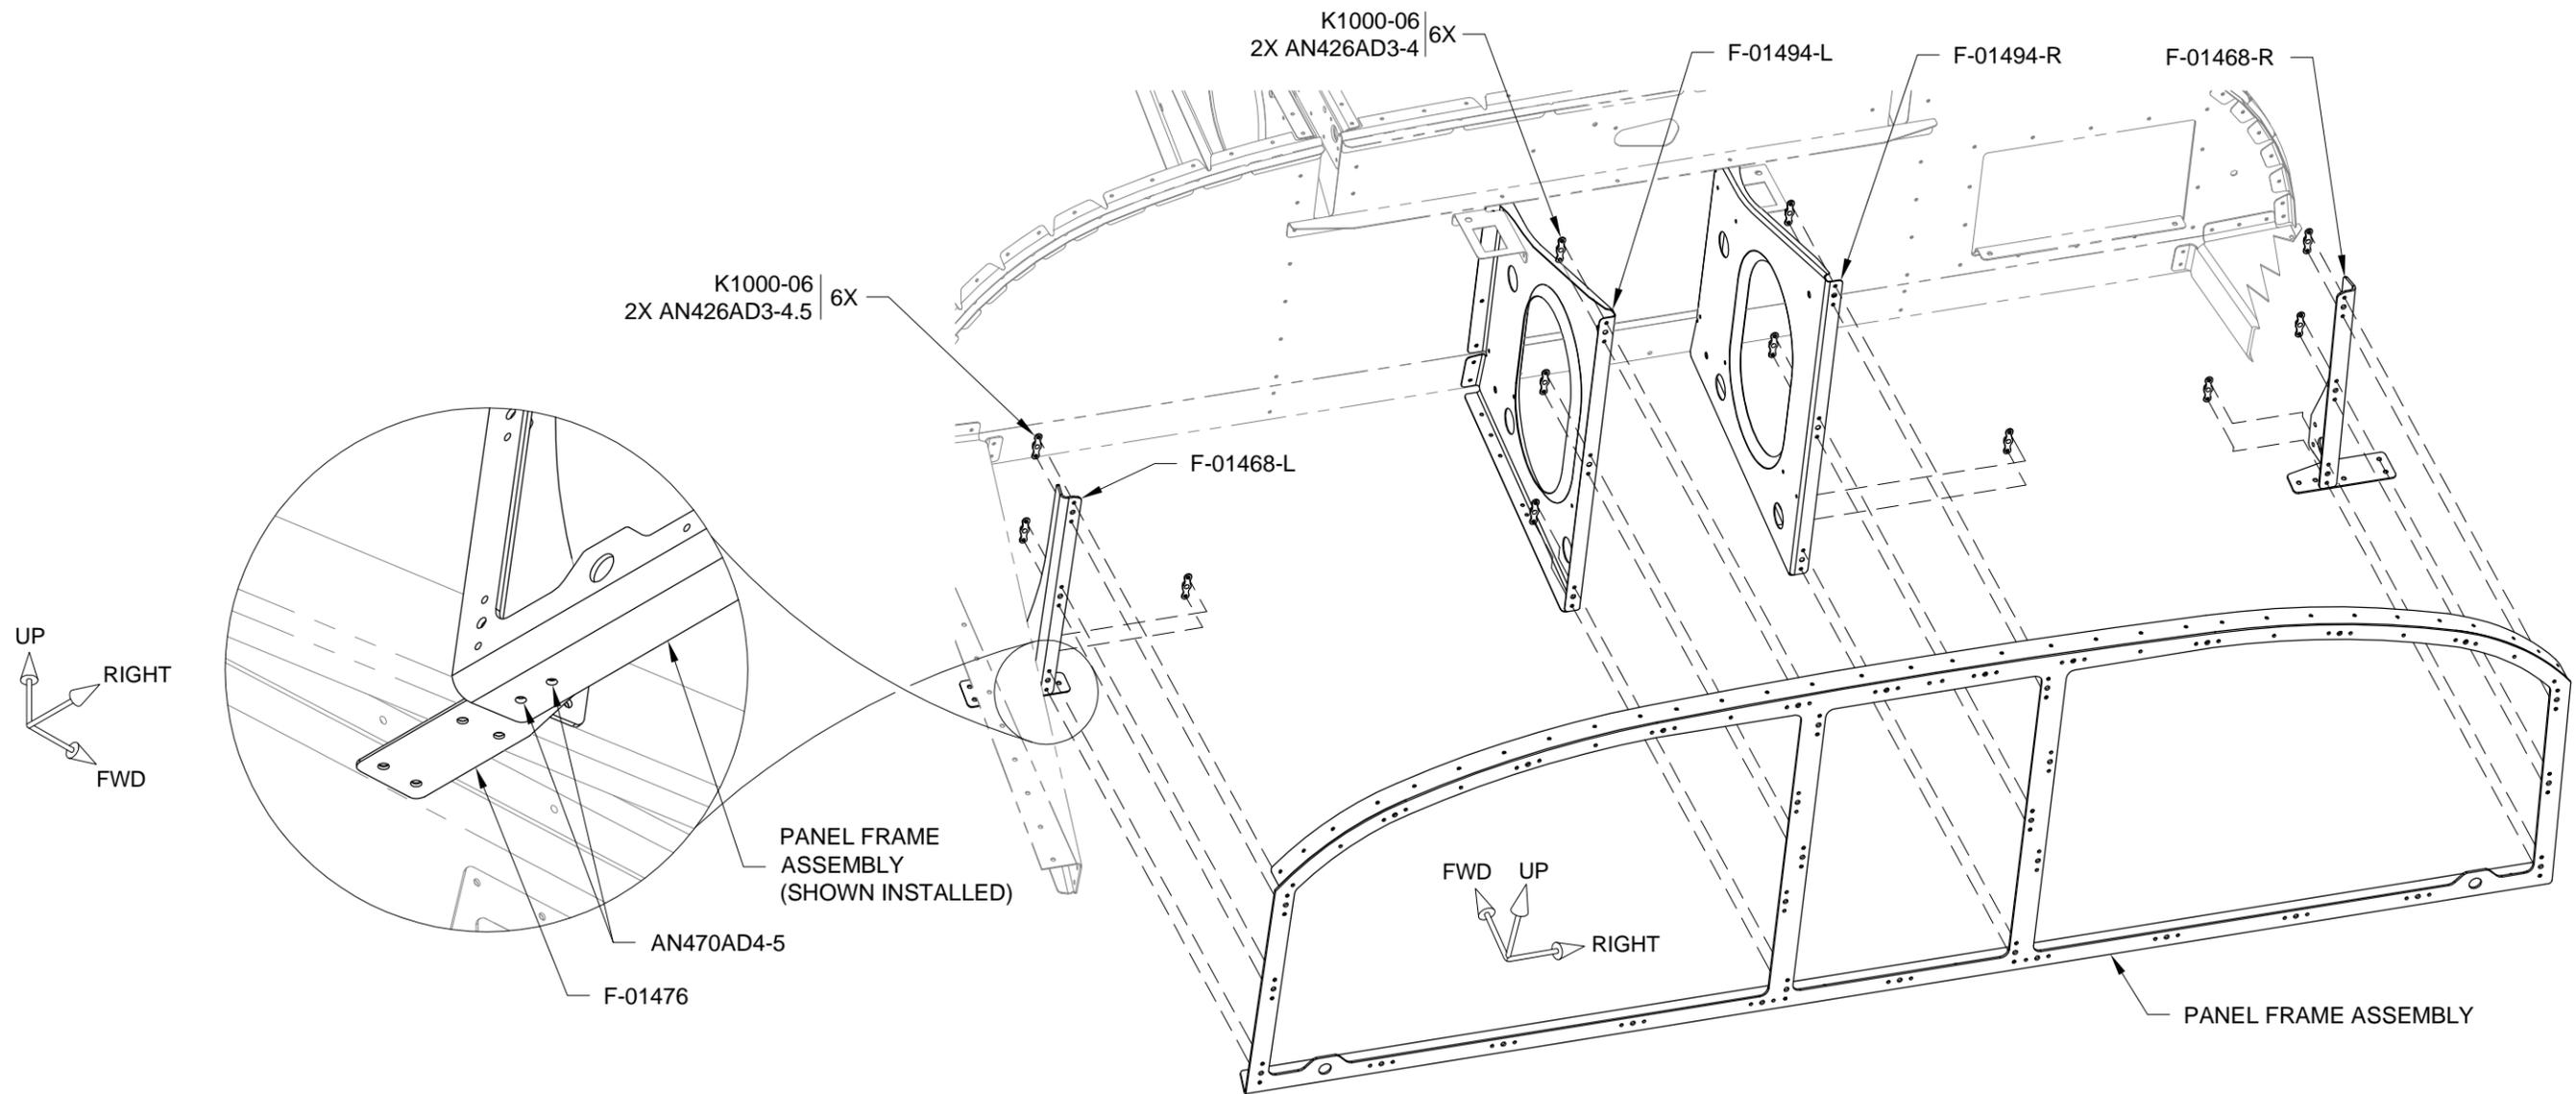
PANEL FRAME ASSEMBLY INSTALLATION
